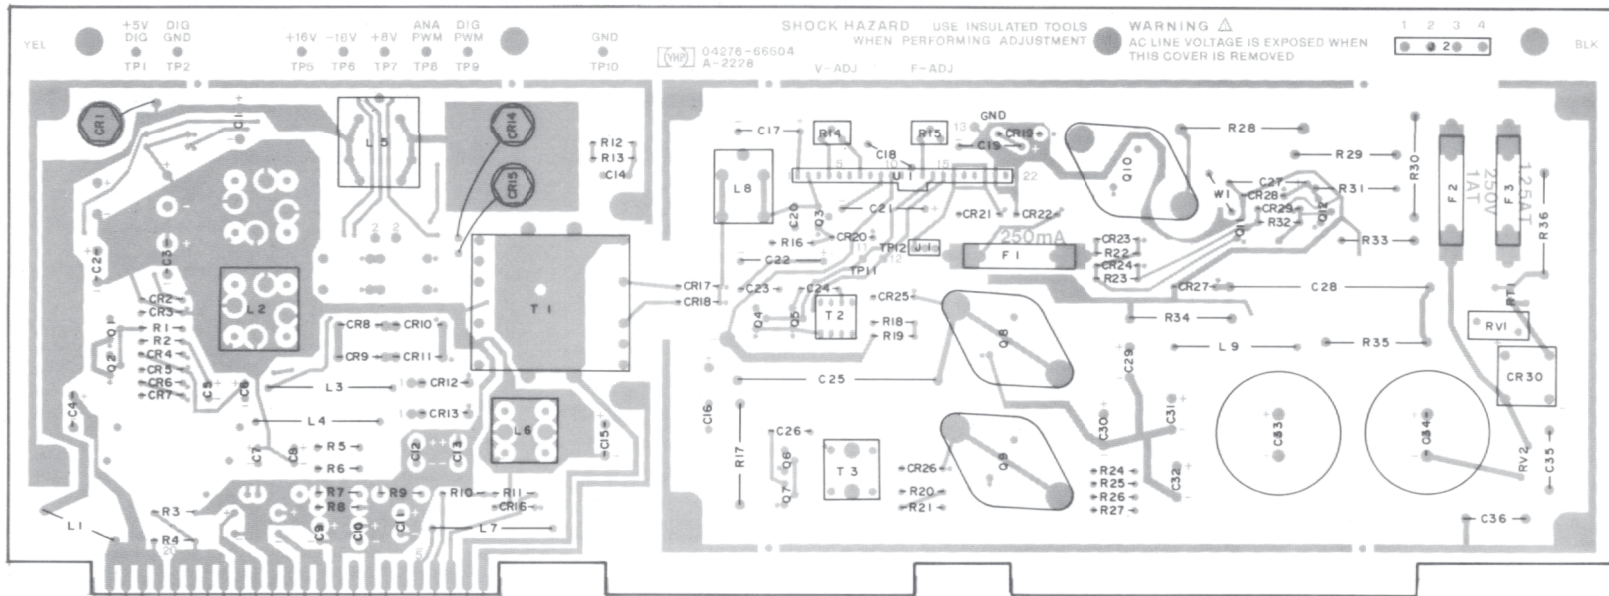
XX. A4 POWER SUPPLY Board Assembly Component Locations.
